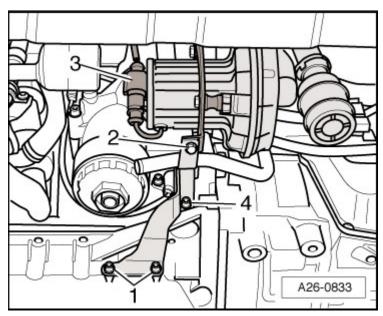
Identifying Secondary Air Injection (AIR) Pump Motor V101 Electrical Harness Connector Courtesy of AUDI OF AMERICA, LLC
